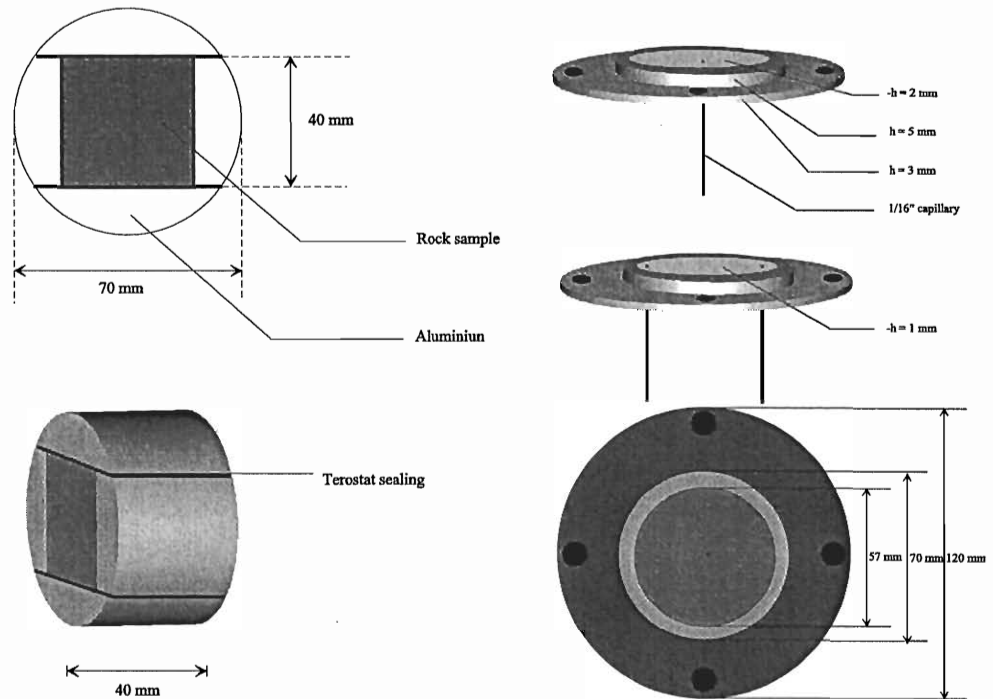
The aluminium parts that transform the cube to a cylindrical form, and the end plates of the measuring chamber.
